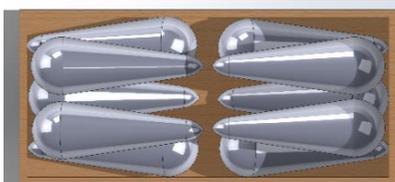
Arrangement of Fishing Weights Inside Electronic Package
